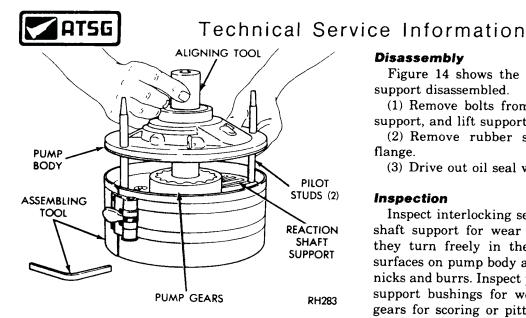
Assemble Pump and Reaction Shaft Support (A-904T and A-999)
